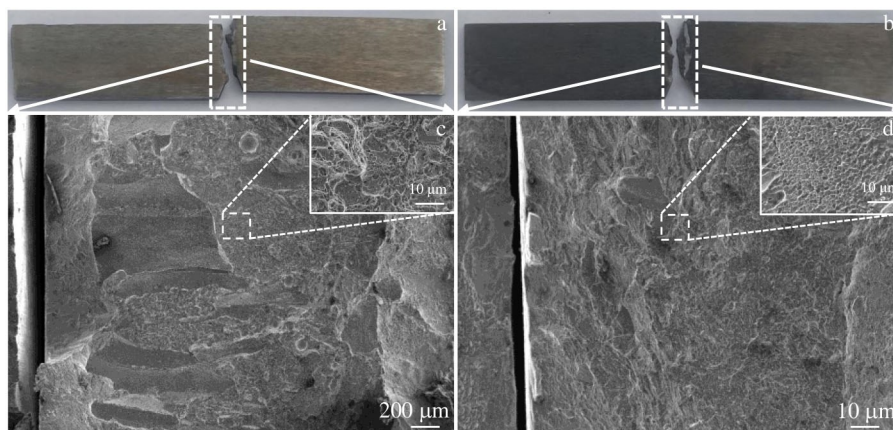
Microstructures and morphologies of impact specimens after fracture: (a, c) welded joint without heat treatment and (b, d) welded joint with heat treatment
